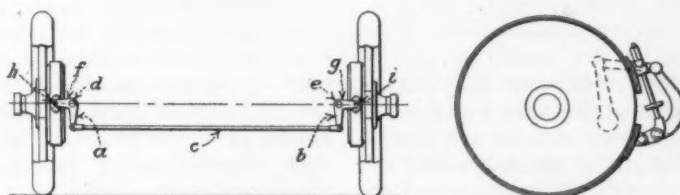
METHOD OF BALANCING BRAKE FORCES
